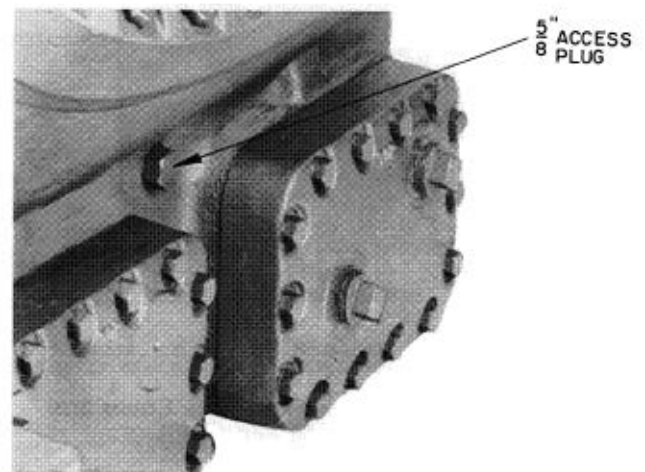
5H80 through 126 Center Main Bearing Housing Setscrew Location
